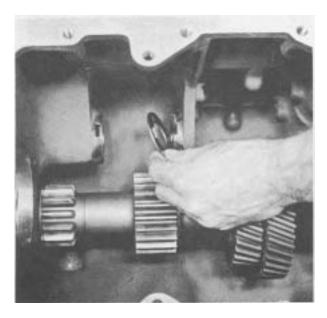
Use heavy grease on reverse idler thrust washers to hold in place.
